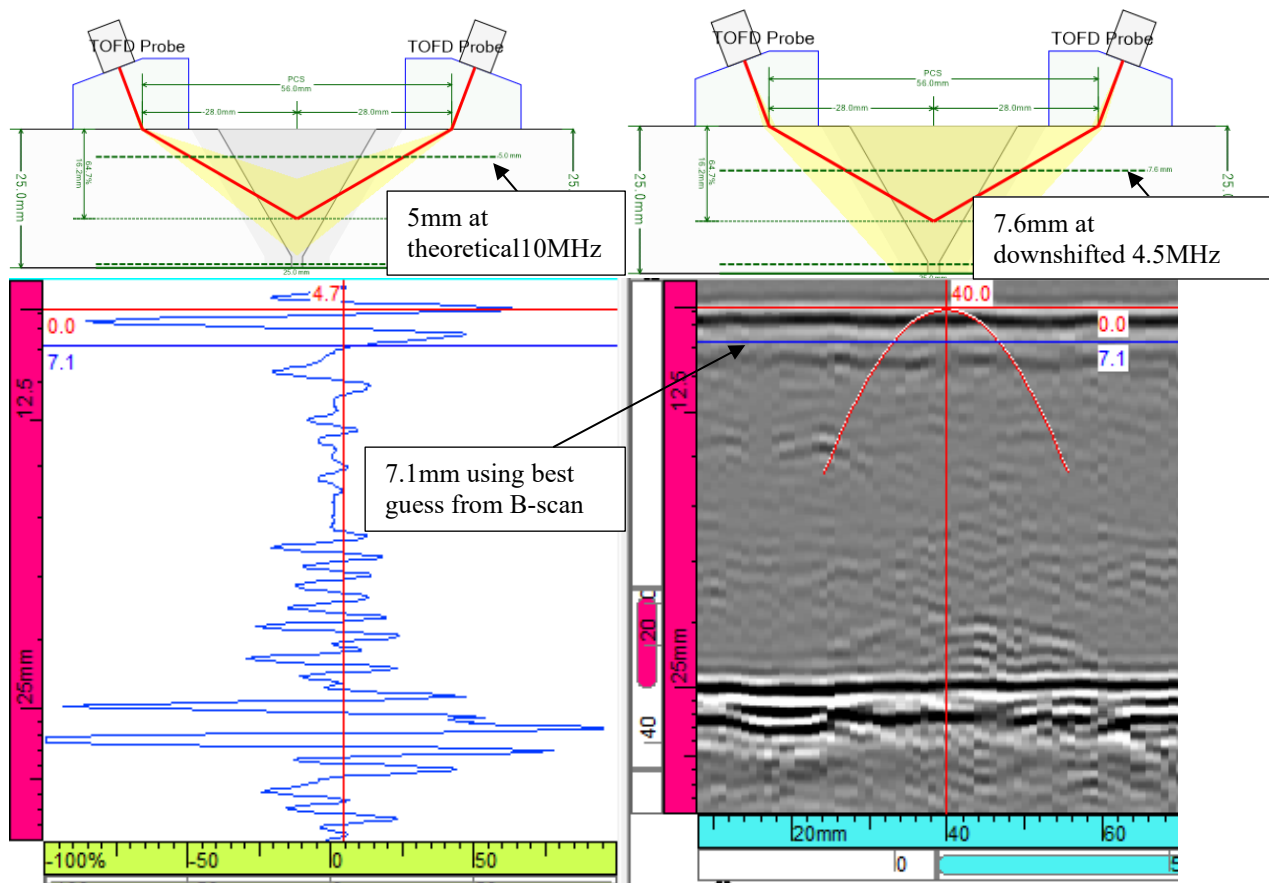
Dead zones for 10MHz 60° TOFD scan of weld in 25mm thick steel plate
